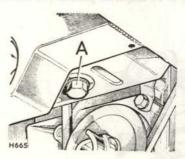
Radiator drain plug A—Drain plug at right-hand side
